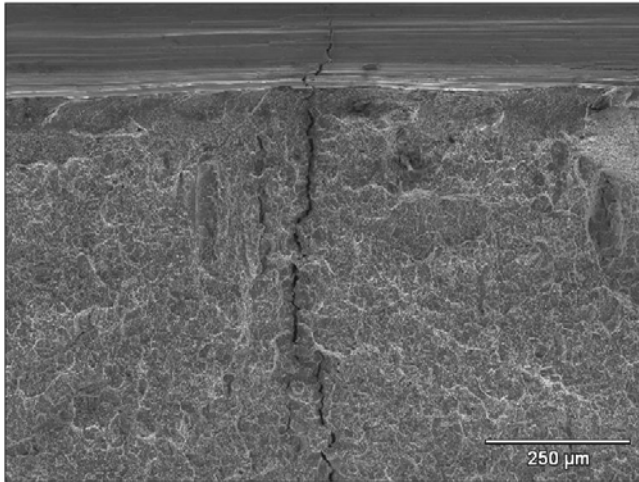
(Left). Secondary cracking evident on fracture surface (FB TL-F2, “mill run” plate).
